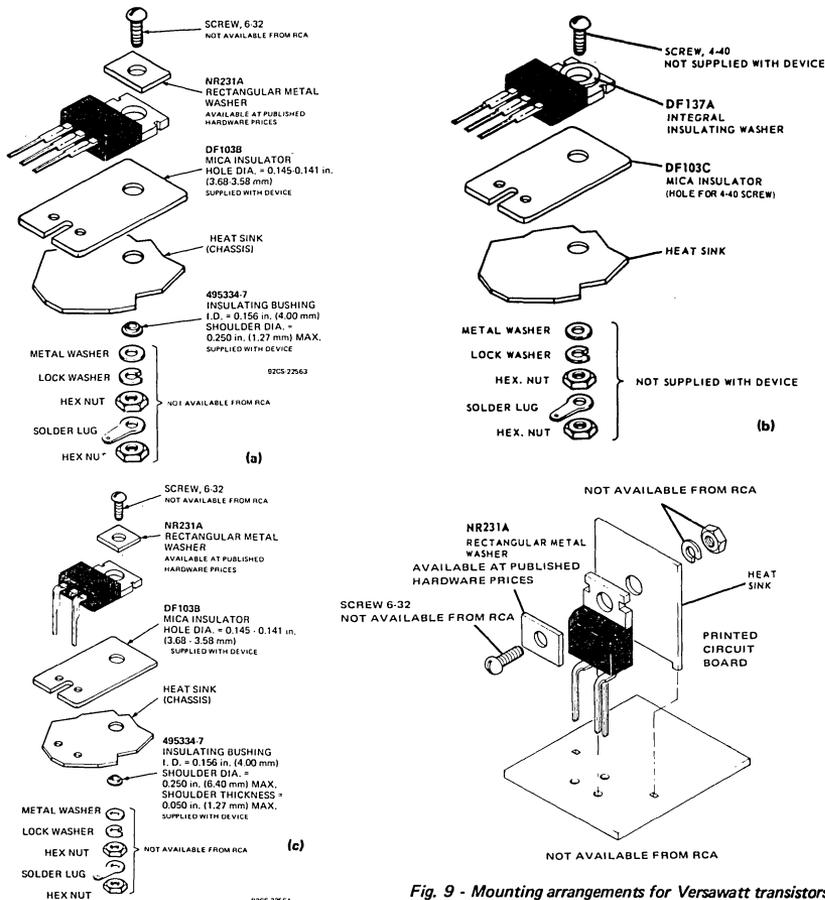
Mounting arrangements for Versawatt transistors: (a) and (b) methods of mounting in-line-lead types; (c) chassis mounting; (d) mounting on printed-circuit boards.
